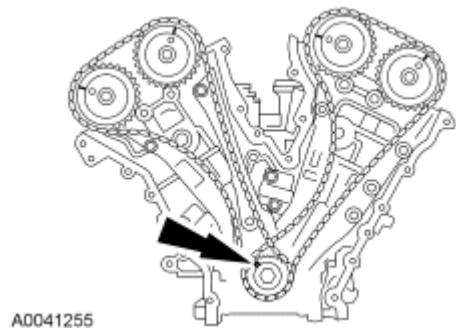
Identifying Crankshaft Keyway In 11 O'Clock Position
